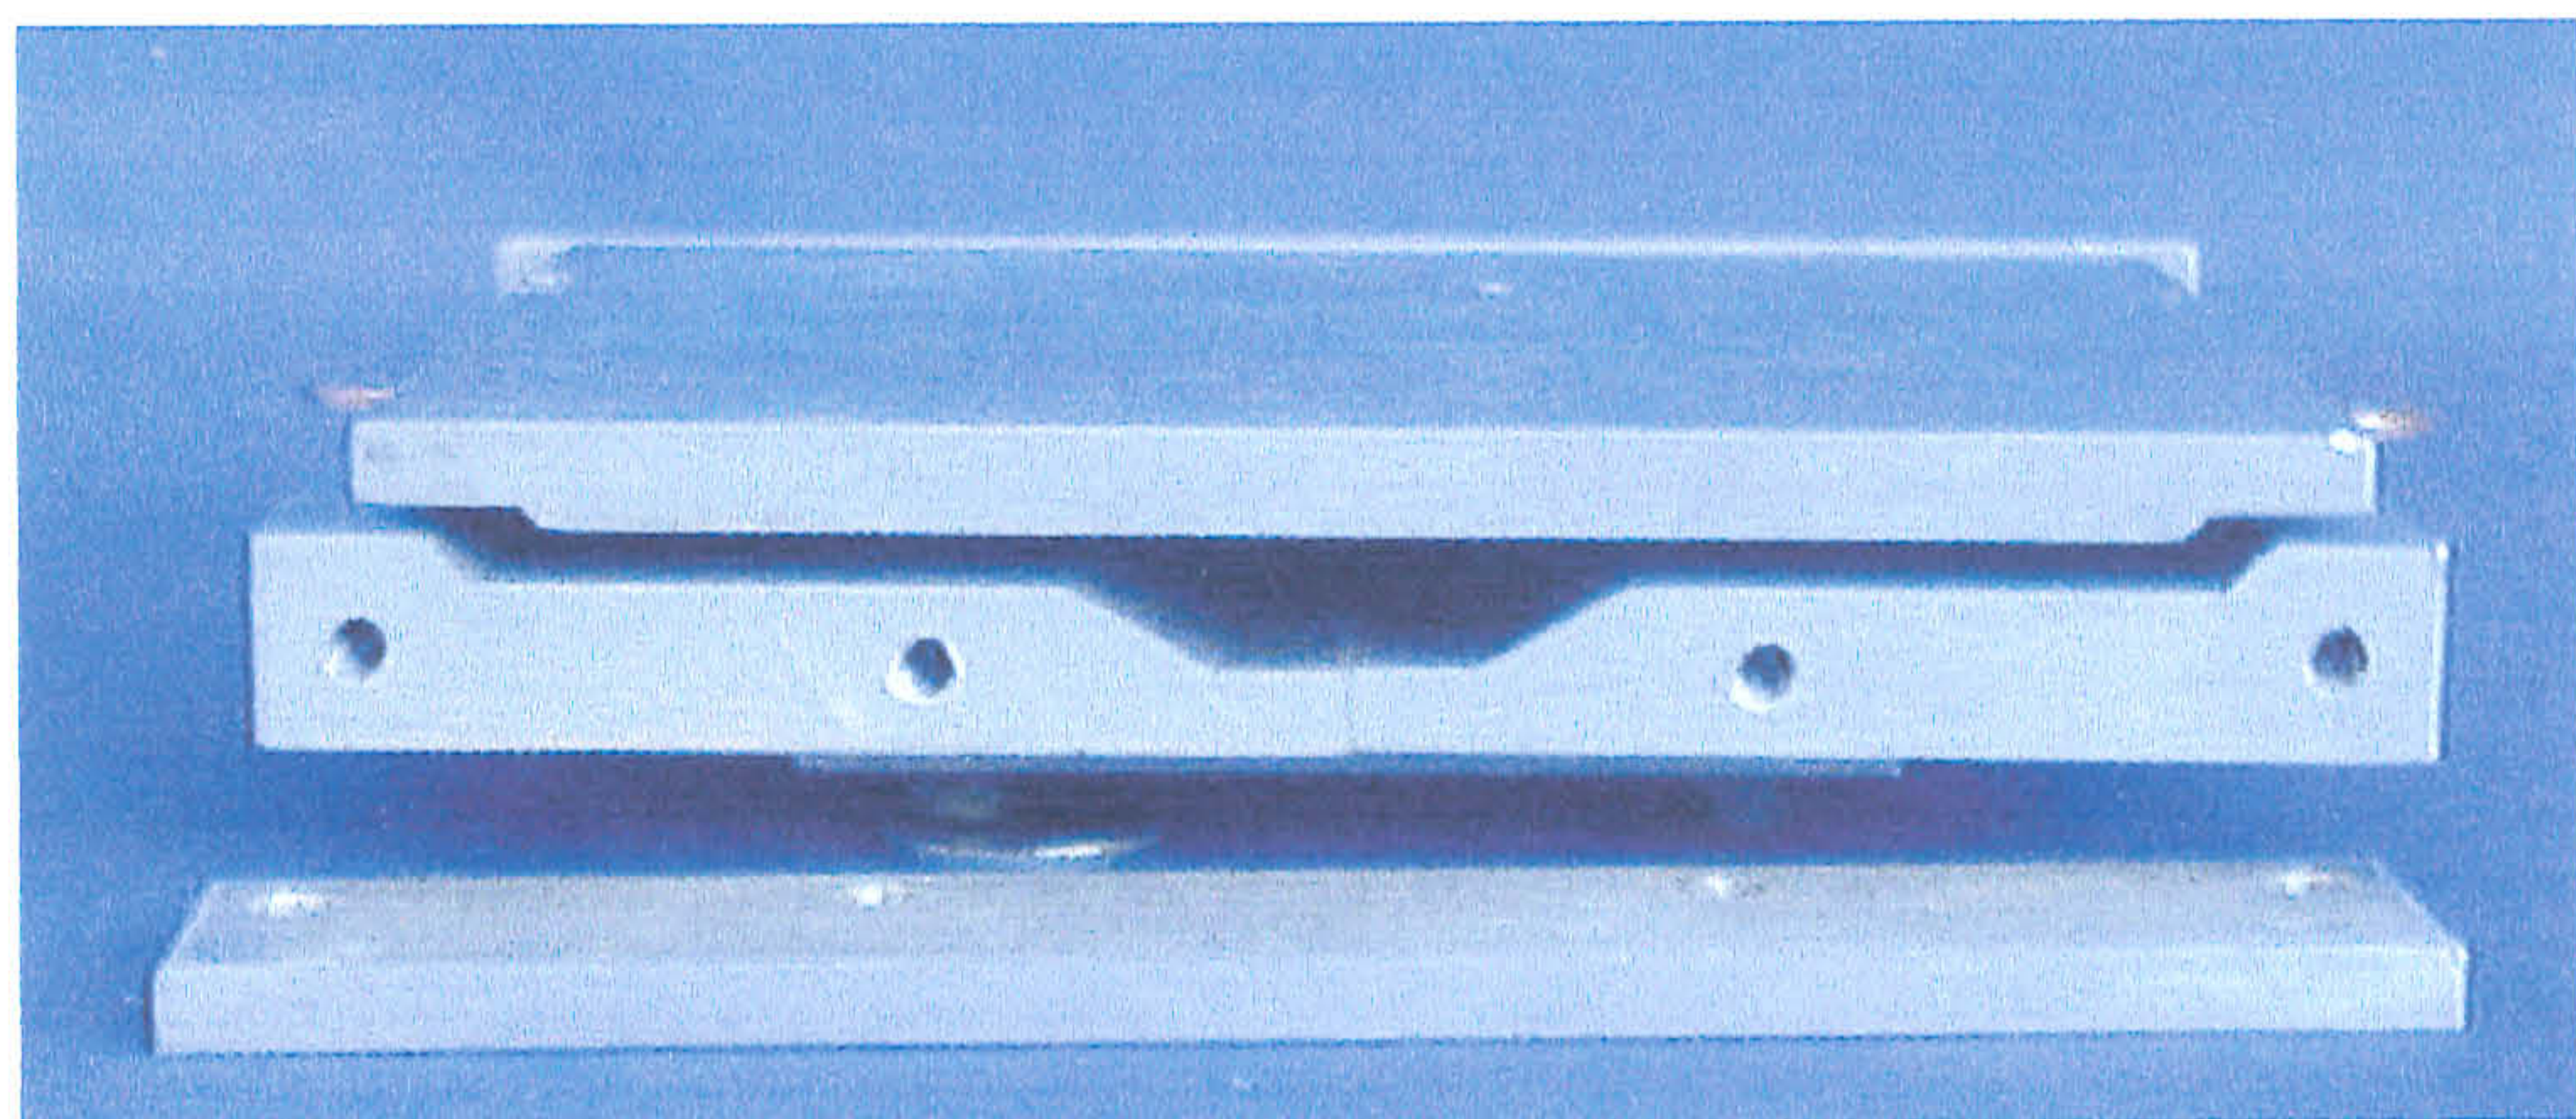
Mould for fabrication of T-shaped composite specimens
